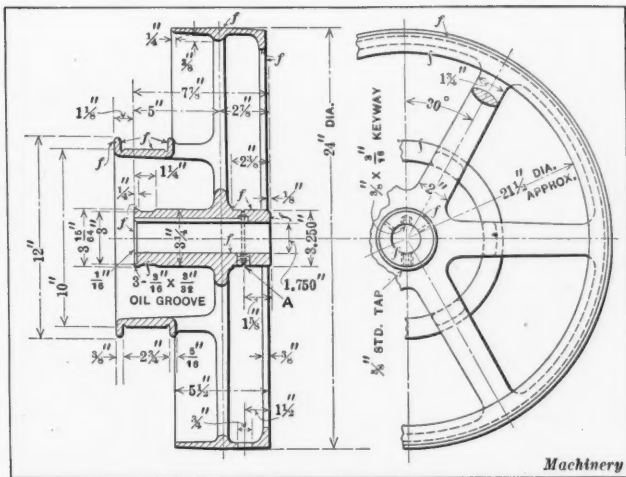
Detailed Drawing of the Driving Pulley shown being machined in Figs. 6 and 7
